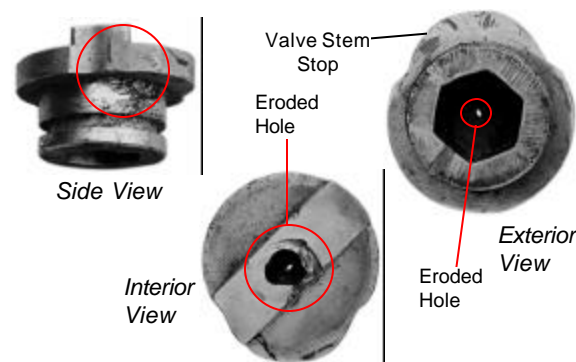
DSSV Stem showing wear on Valve Stem Stop and Erosion by Fluid
